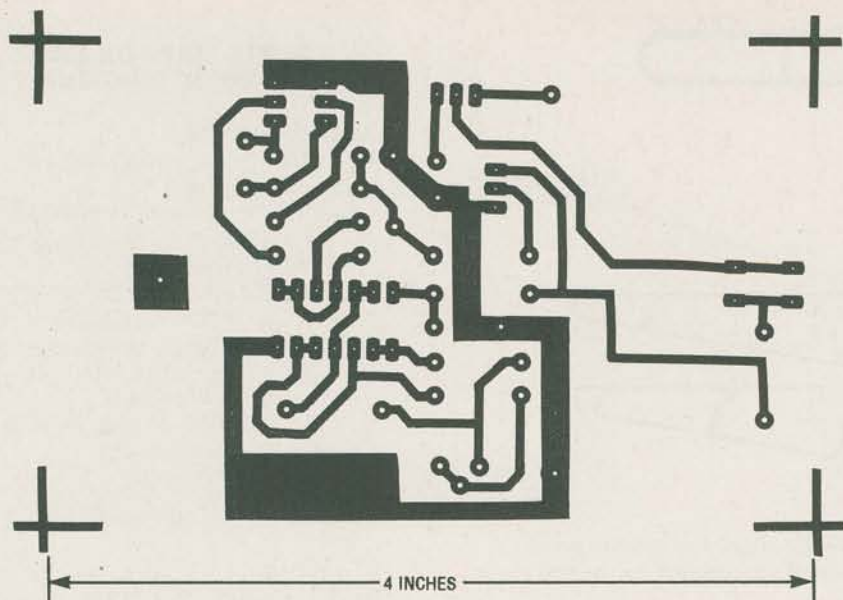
You can make your own printed-circuit board from this foil pattern.
